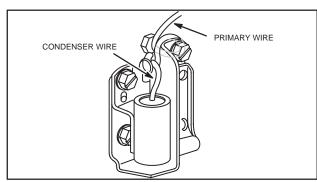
INSTALLING PRIMARY WIRE AND CONDENSER
